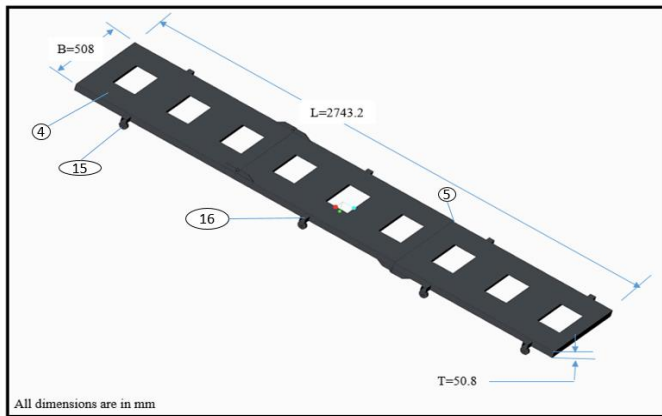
Model Used as Slope (fully open condition)/ Fully Open trolley
